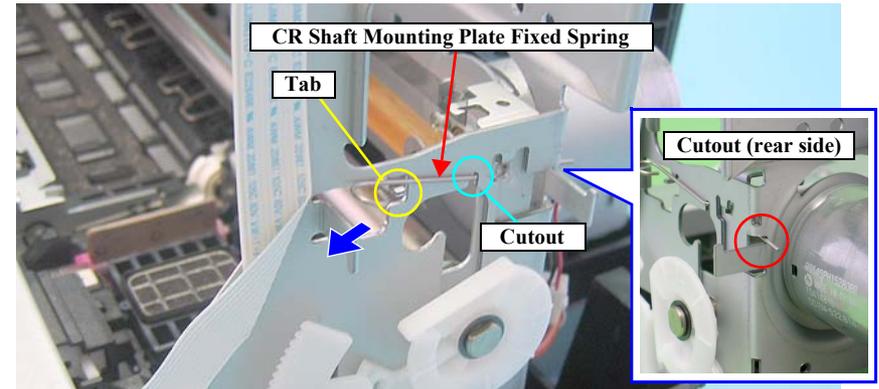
Removing the CR Shaft Mounting Plate Fixed Spring
